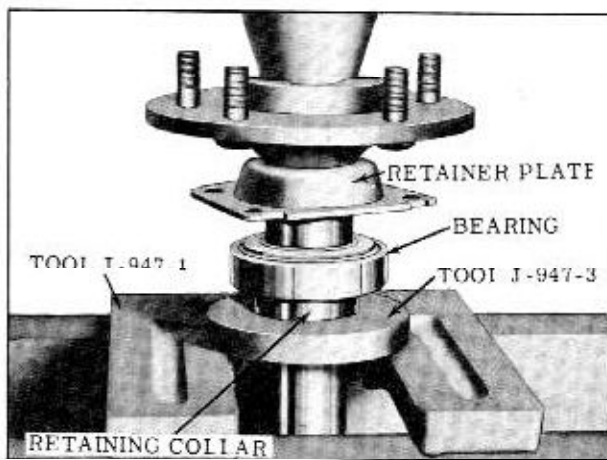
Installing Axle Shaft Bearing Retainer
